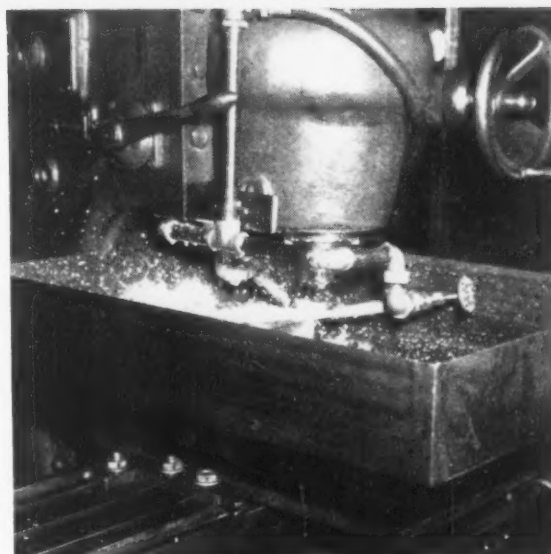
Tool life test set up with emulsion flowing from one nozzle placed behind blade as it enters workpiece.
